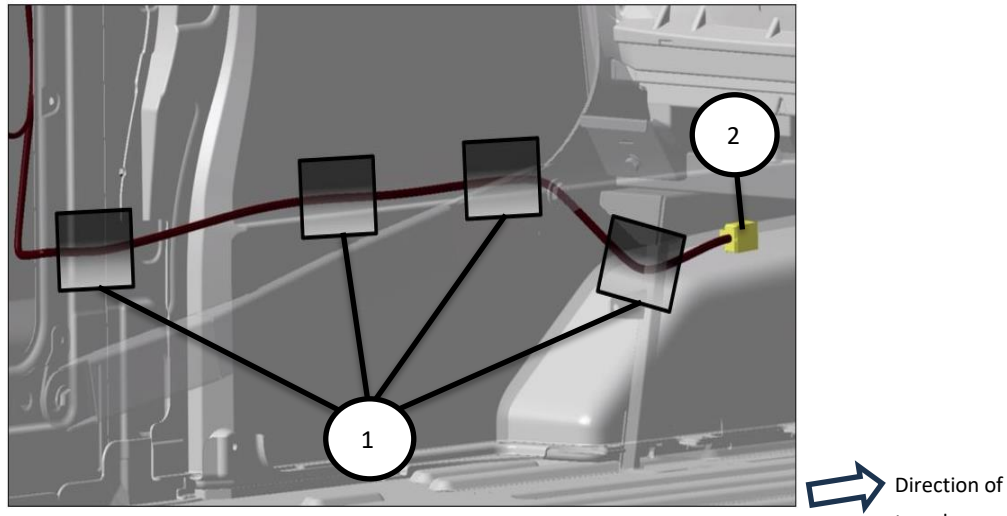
Detailed view of the wiring harness for seat-occupied recognition in the interior on the left-hand side, secured with adhesive pads
